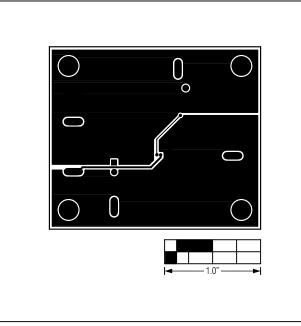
MAX17502G EV Kit PCB Layout—Solder Side
